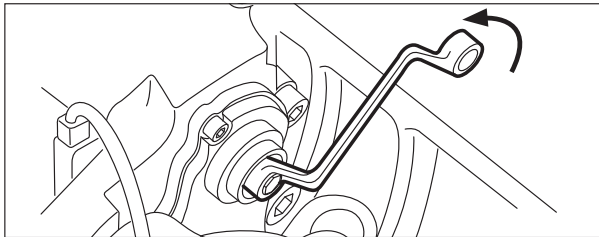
BACKING OFF THE ADJUSTER FOR PAD REMOVAL
